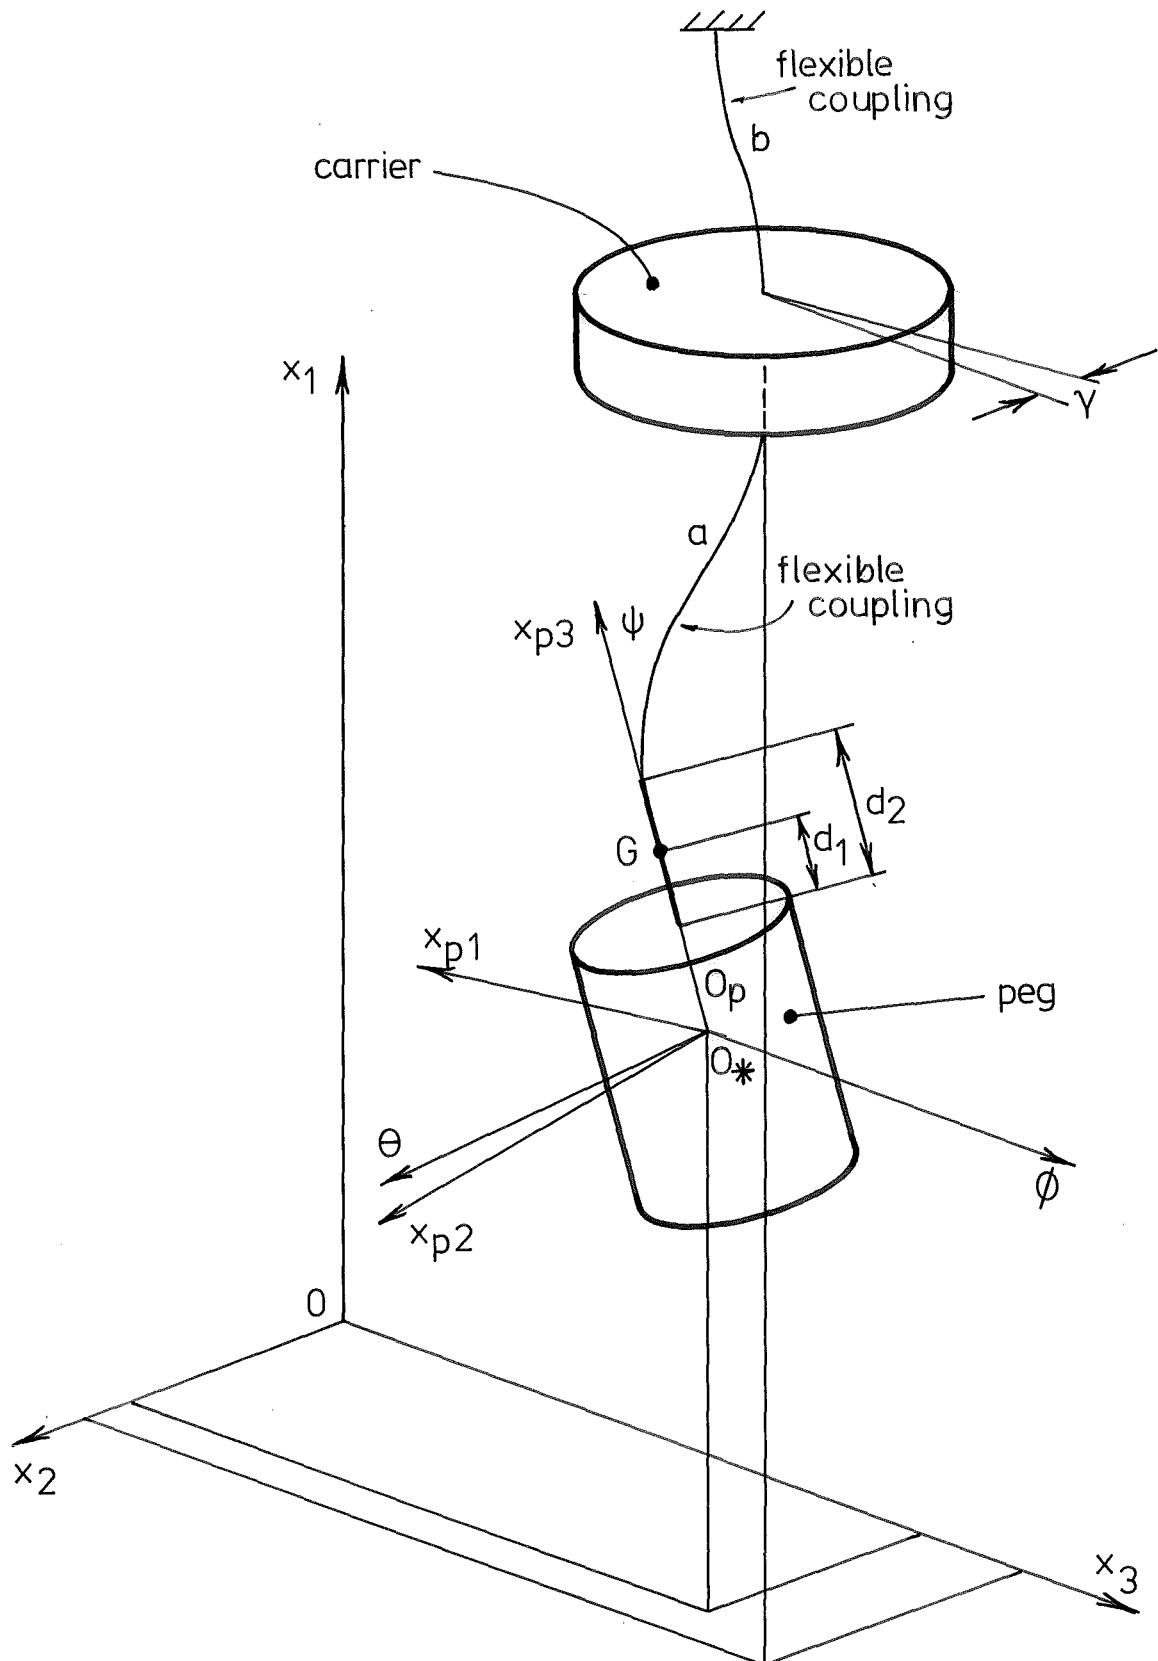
IDEALIZED ASSEMBLY SYSTEM
